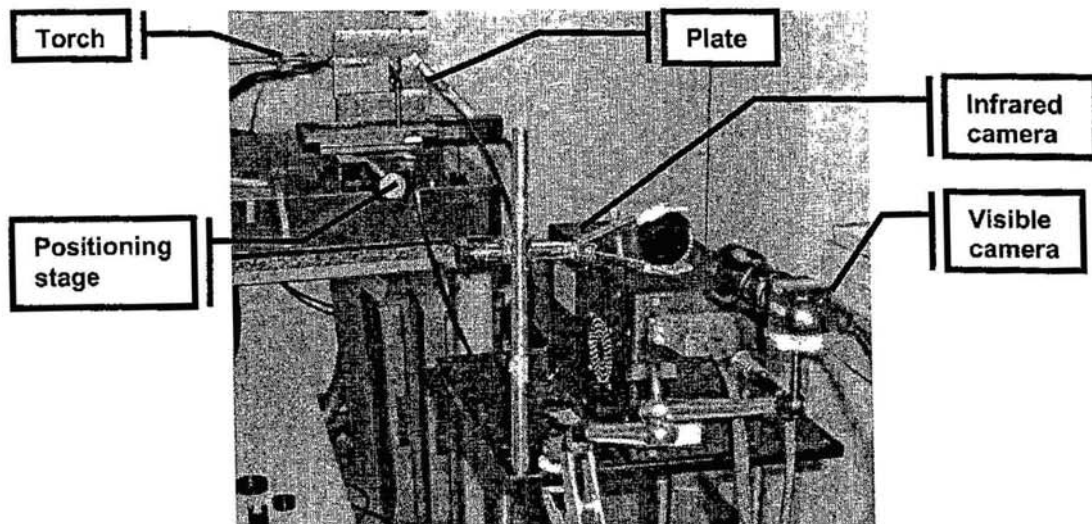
Experimental setup to perform welds in controlled conditions.
